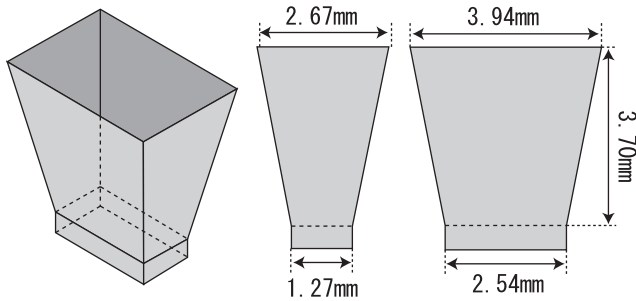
Geometrical dimensions of horn shape for radiating waveguide.
